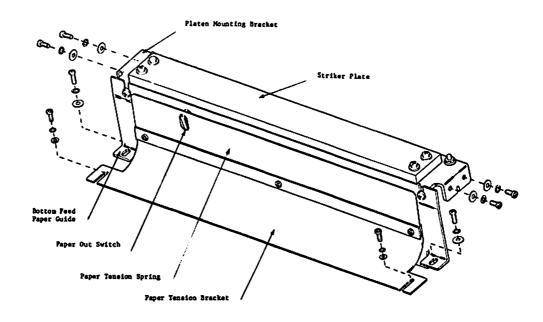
PAPER GUIDE ASSEMBLY
